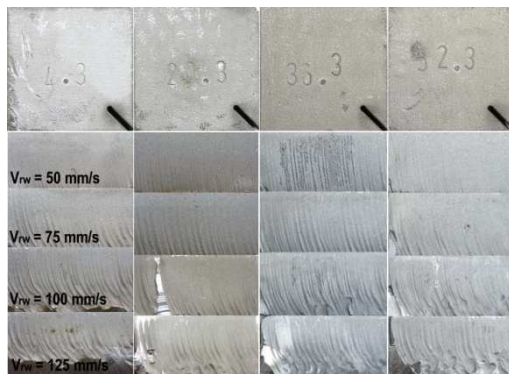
Surface view of selected test samples cut with abrasive amount of 250 g/min
